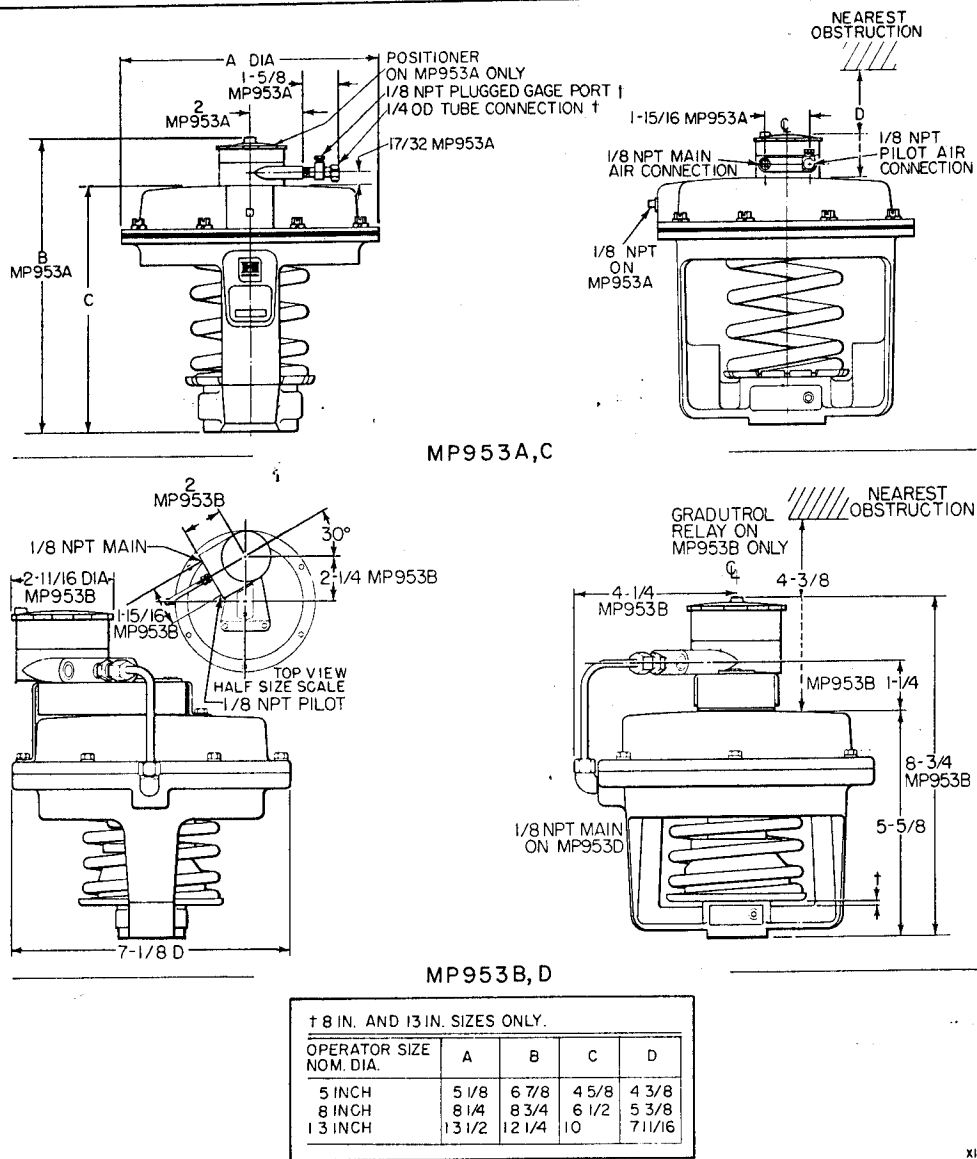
APPROXIMATE DIMENSIONS OF VALVE OPERATORS
